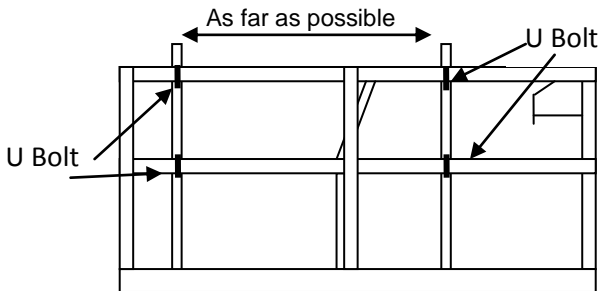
Rio Bar & Tube Handler attachment installation – Deck retracted
